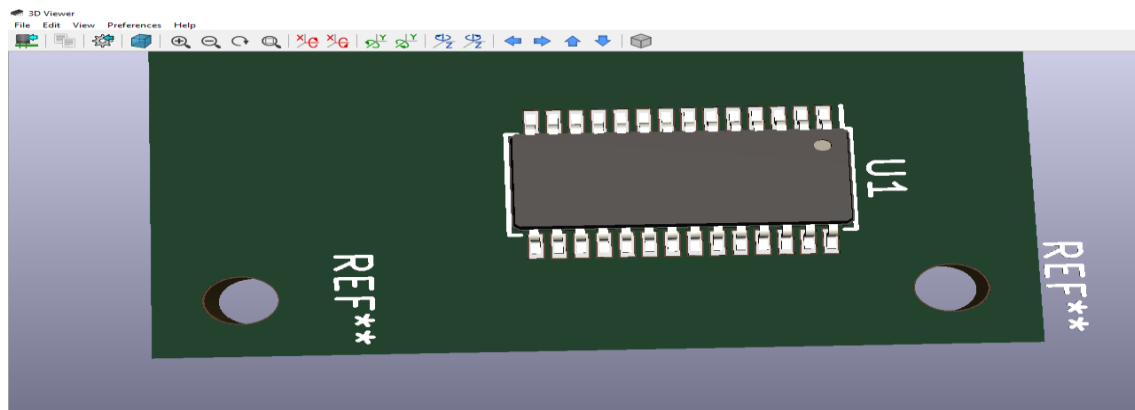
3D Viewer Mounting Hole clearance on MSP430 on child PCB #1
